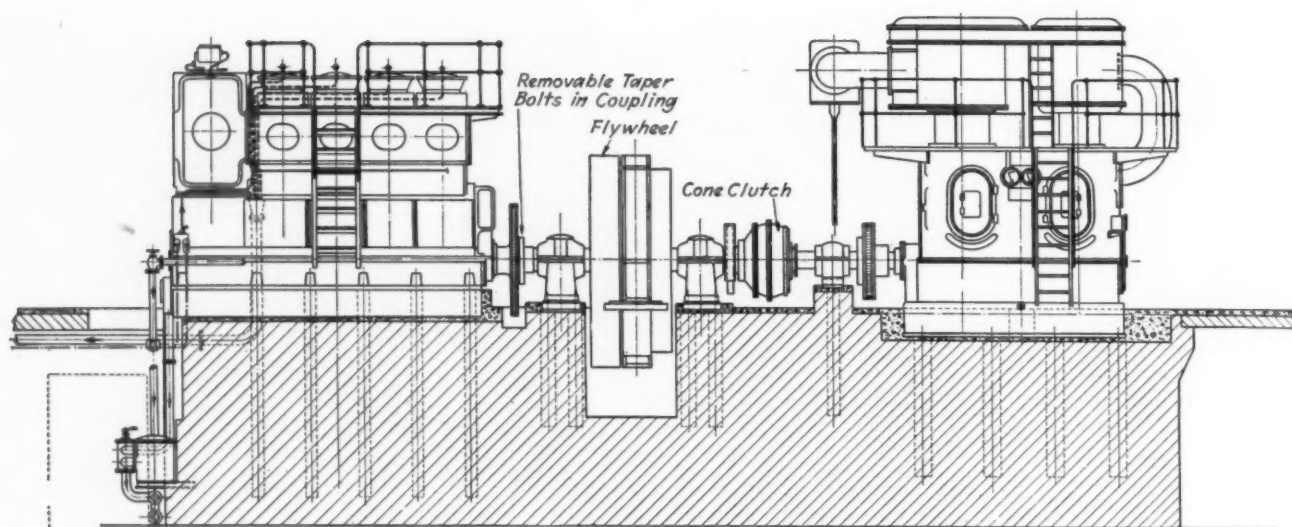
COMPOSITE OIL-ENGINE-DRIVEN ELECTRIC GENERATOR AND AIR COMPRESSOR
